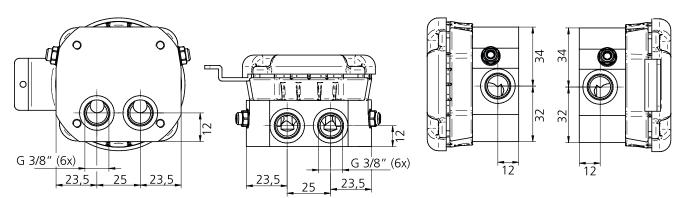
Connections: Six 3/8" connections. Supplied with mounted clamp-ring couplings for Ø 12 mm pipes.
